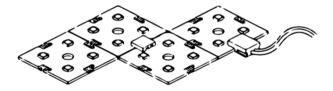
MMX segments held together by connectors that ensure power supply (drawing courtesy of LUMITRONIX® LED Technik GmbH, 2017).
